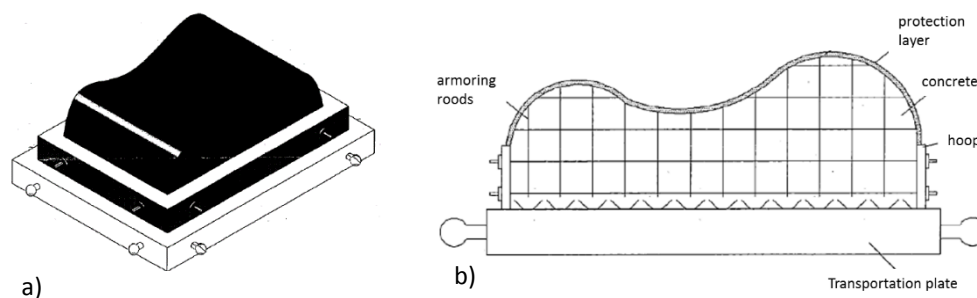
Patented tool drawings: a) 3D drawing of the tool and b) section through the middle of the 3D drawing showing all the elements
